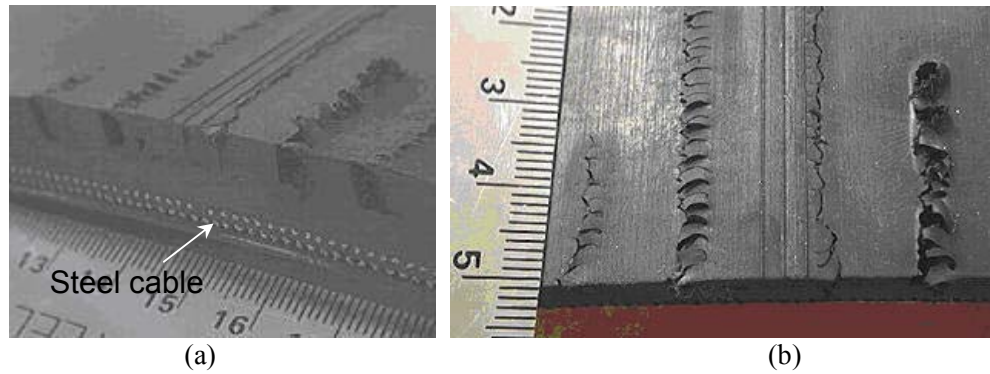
Results of the preliminary elastomer end milling test that failed to make a clear-cut groove on an elastomer workpiece with steel cable reinforcement: (a) side view, and (b) front view.
